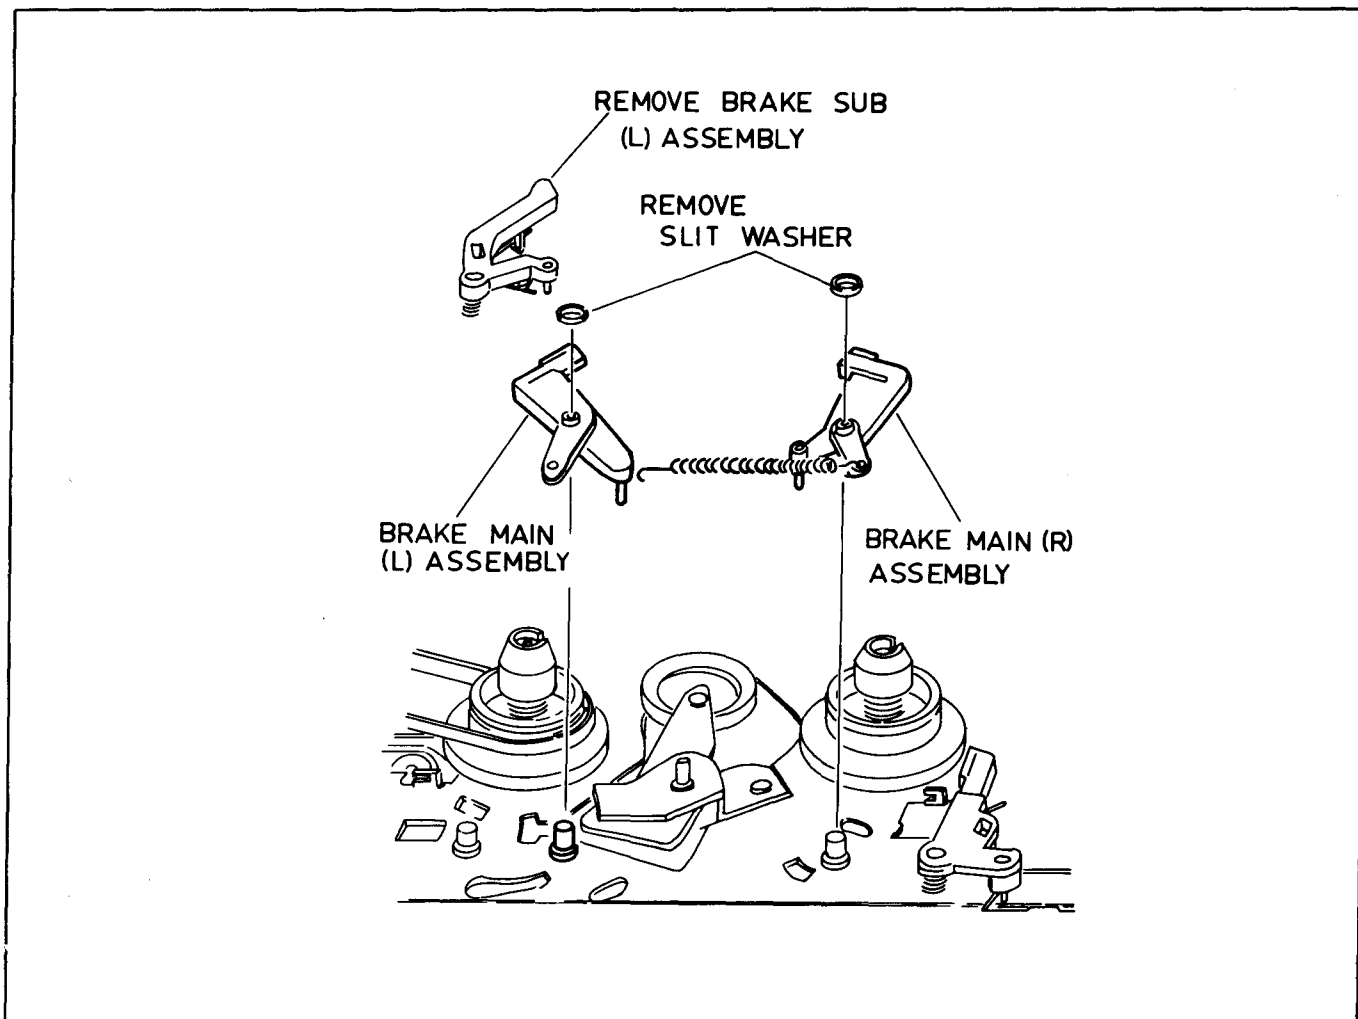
Brake Main (L) Assembly and Brake Main (R) Assembly Removal
